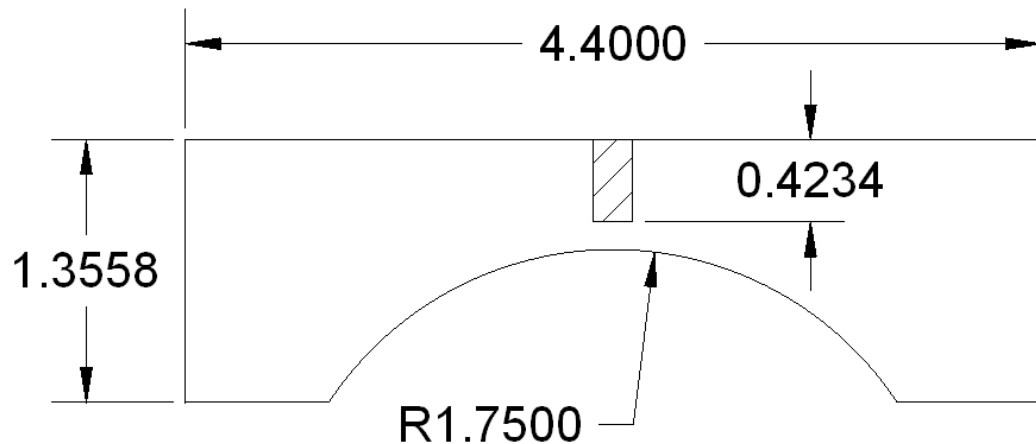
CAD drawing of acrylic fixture used to attach the accelerometer to the bed of the wall. The hatched portion denoted a tapped hole. Dimensions are given in inches
